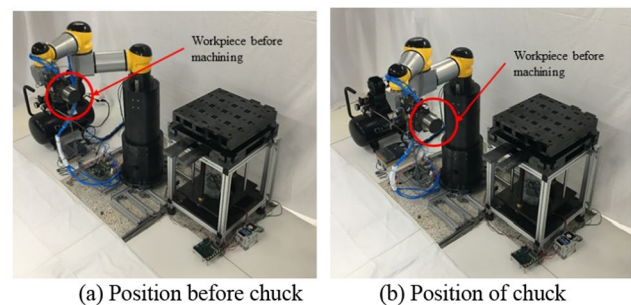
Characteristic test result of 5-axis robot inserting workpiece into chuck of machine tool
